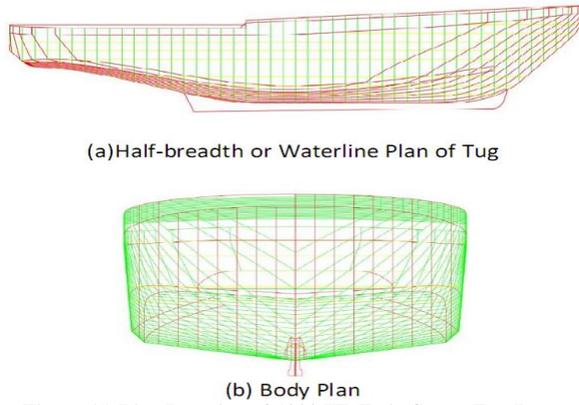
Line Drawing of 1000 HP Twin Screw Tug Boat
